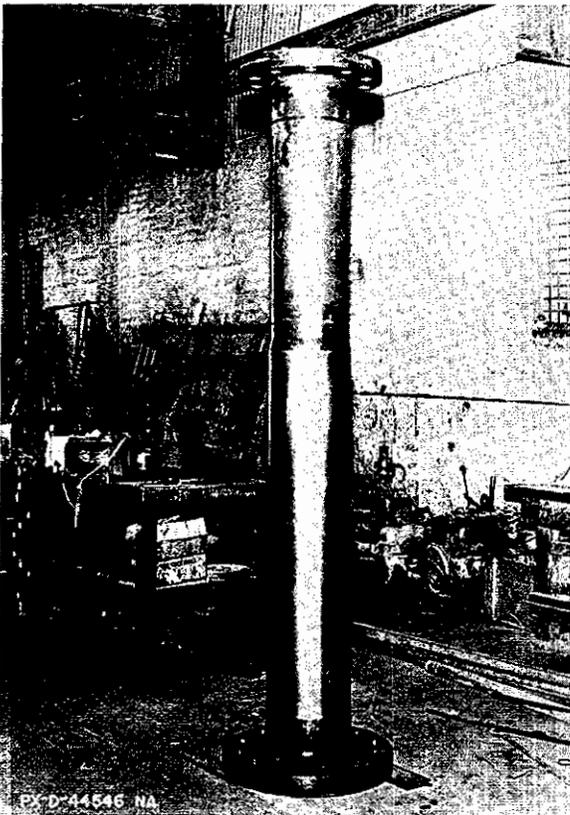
Girishk Powerplant Unit 2. Turbine shaft after machining undersize to eliminate grooving. Shaft will be used temporarily while Unit 1 is shut down for examination.
